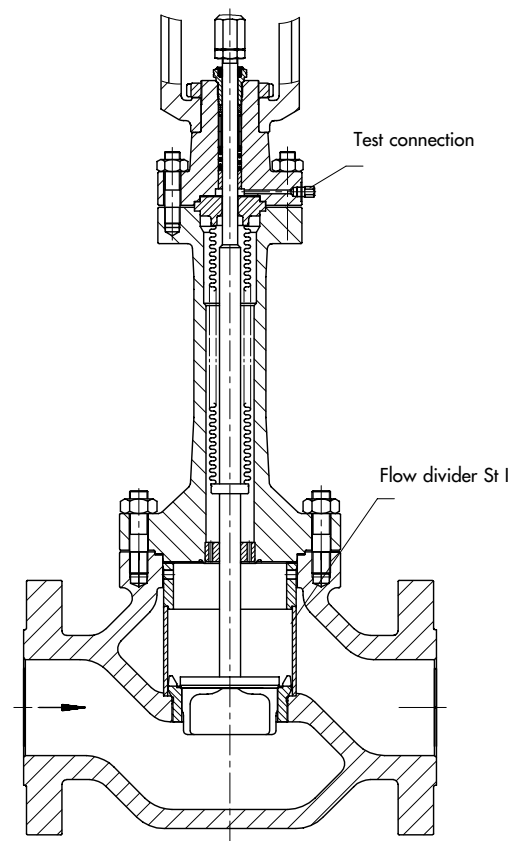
· Type 3251 Globe Valve with St I Flow Divider and
